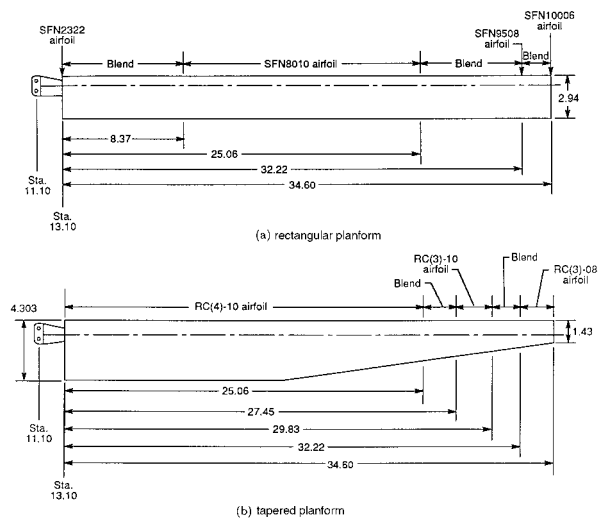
Geometry of Mach-scaled model rotor blades. All dimensions are in inches.
